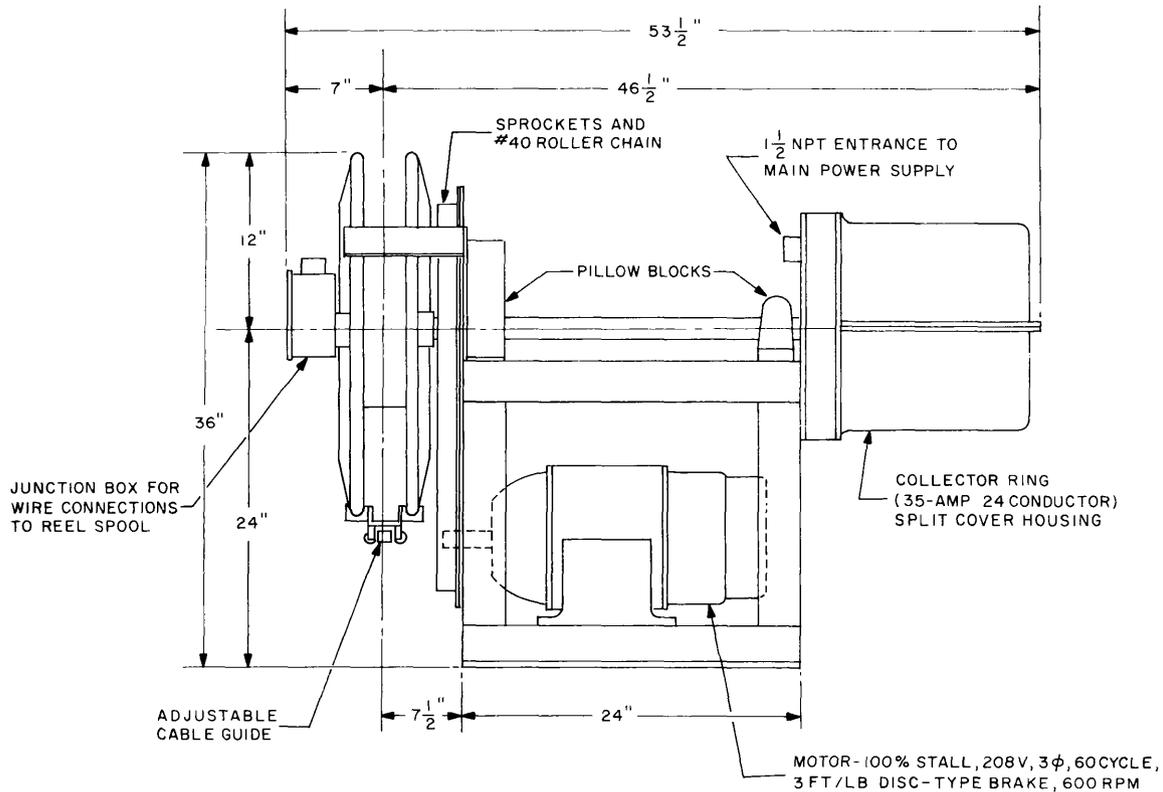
Outline of cable take-up reel (designed and mfd by Industrial Electrical Works, Inc.)
